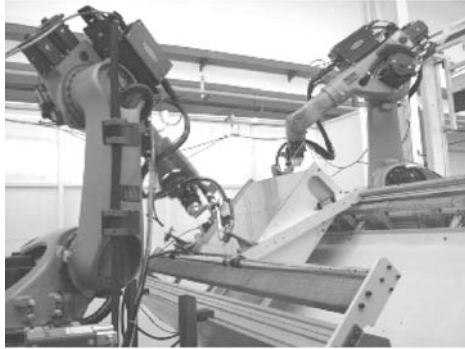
Robot welding system with seam tracking sensors
